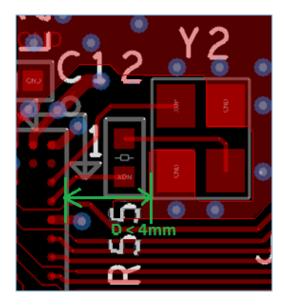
Clock PCB Ref of BGA83 (reference)
